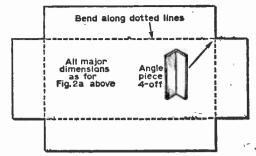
With this form of construction, "lips" are re placed by aluminium angle. After bending, the sides of the chassis are secured with the angle pieces.
